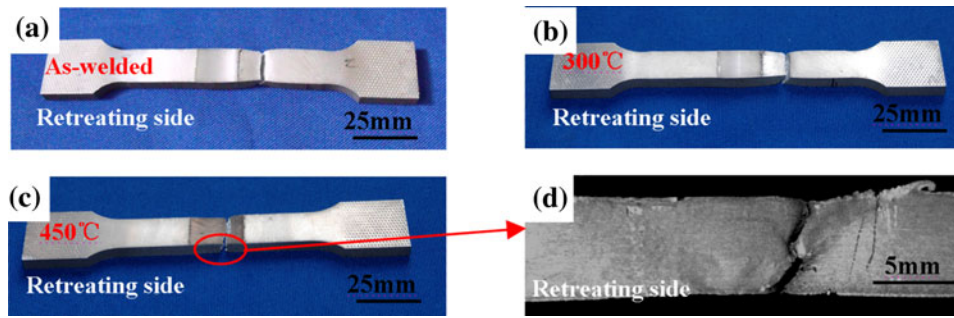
The fracture of FSW joints: (a) as-welded, (b) 300°, (c) 450°, and (d) macro fracture cross section of 450° PWAT joint
